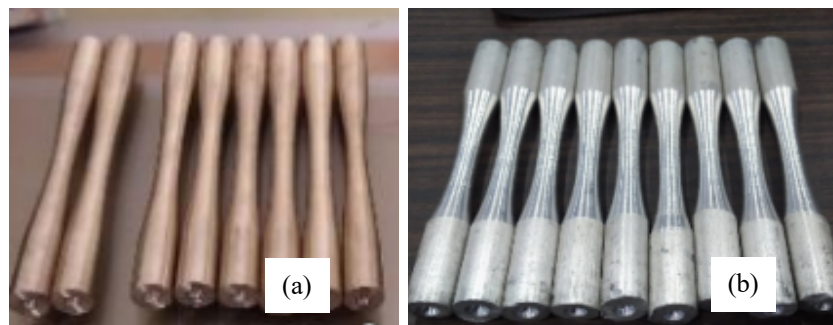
Specimens before fatigue test: (a) Brass and (b) Aluminium
